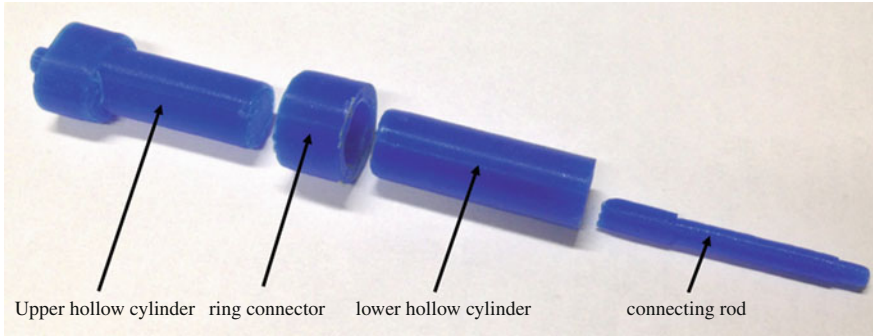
A printed prismatic pair for the LARM tripod locomotor in Fig. 2
